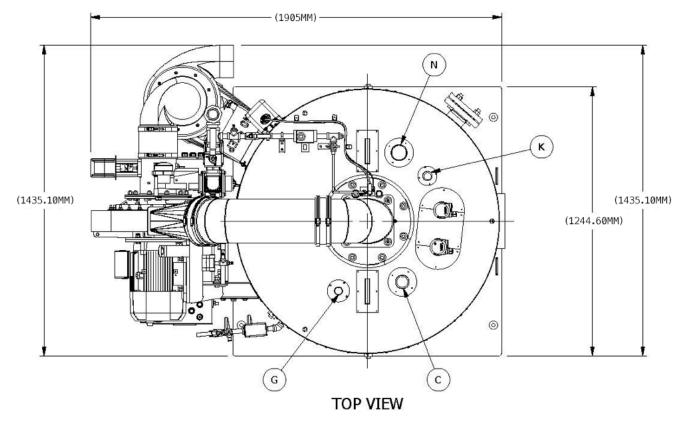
Model VSRT-60 Dimensions – Top Side View
